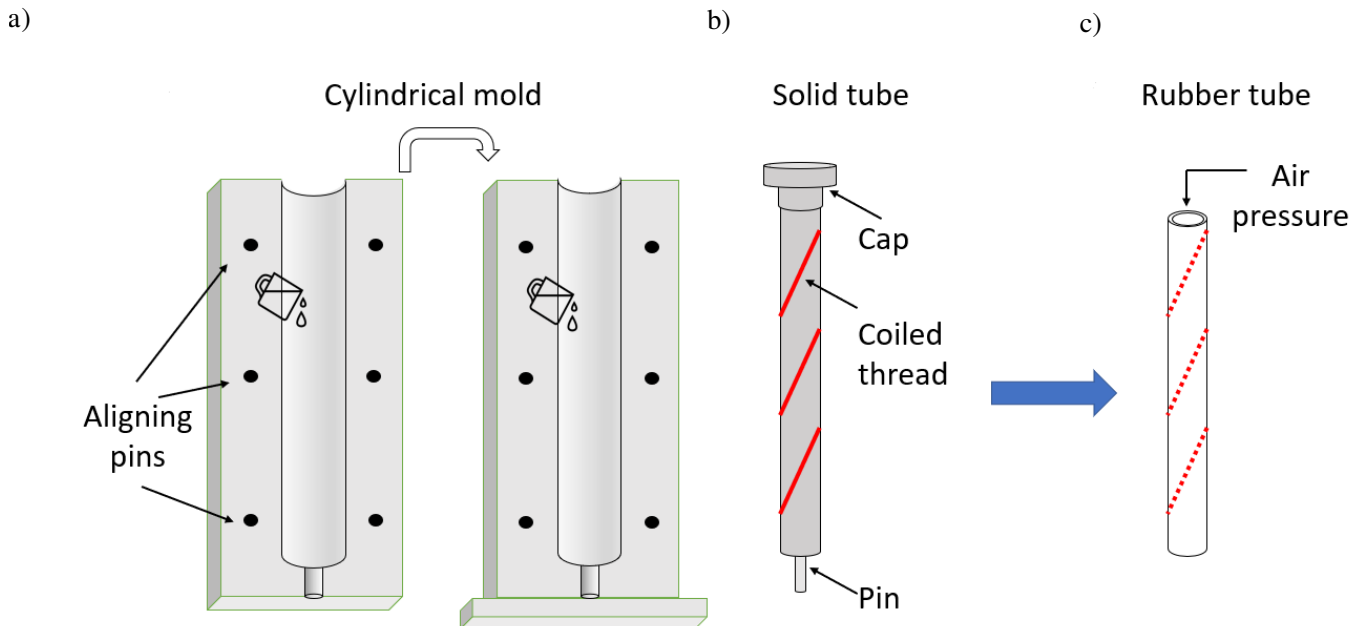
Making of inflatable rubber tubes. a) The two halves of the 3D printed mold create a cylindrical cavity, to which the liquid rubber is poured. b) a 3D printed solid tube, with an unextensible thread coiled around it, is placed between the two mold halves. c) After over-night curing, the rubber tube with an embedded helical thread is released from the mold. Connected to a pressure source, it can now be inflated in a controlled manner.
